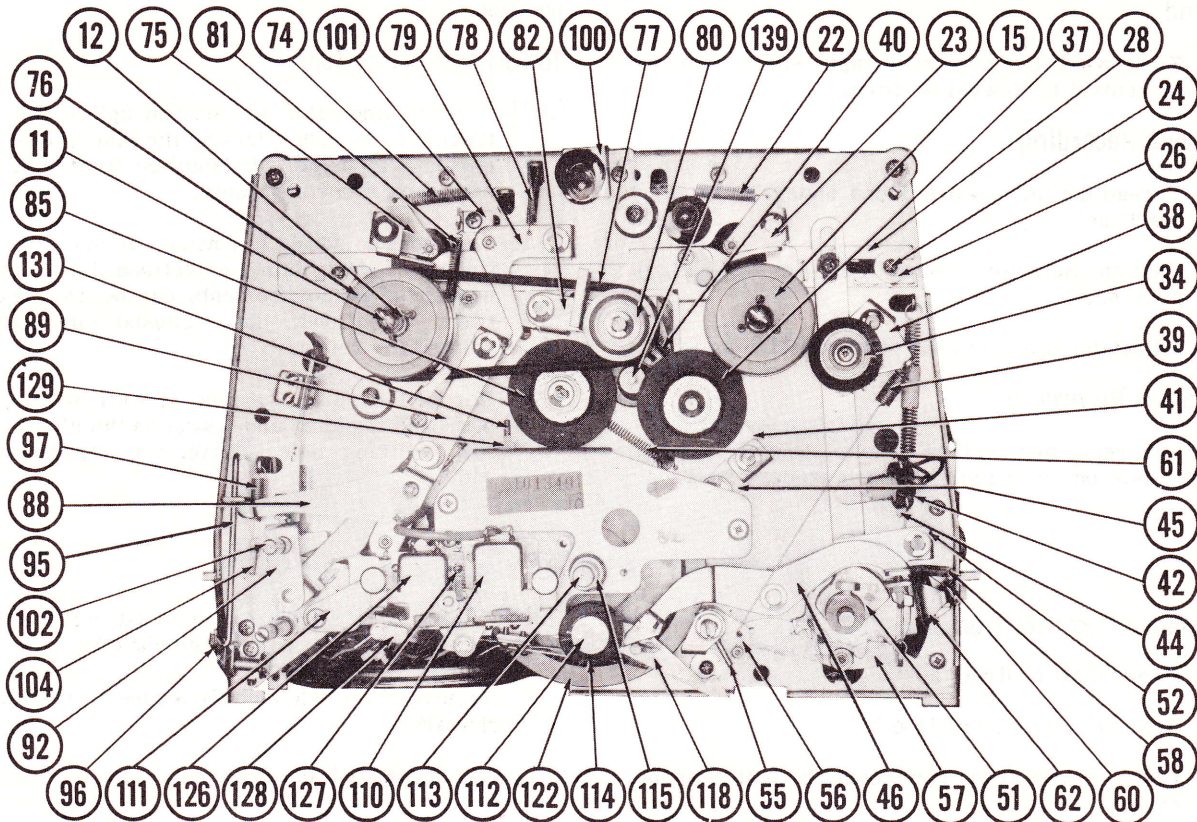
TOP VIEW OF MECHANISM WITH TOP COVER REMOVED
